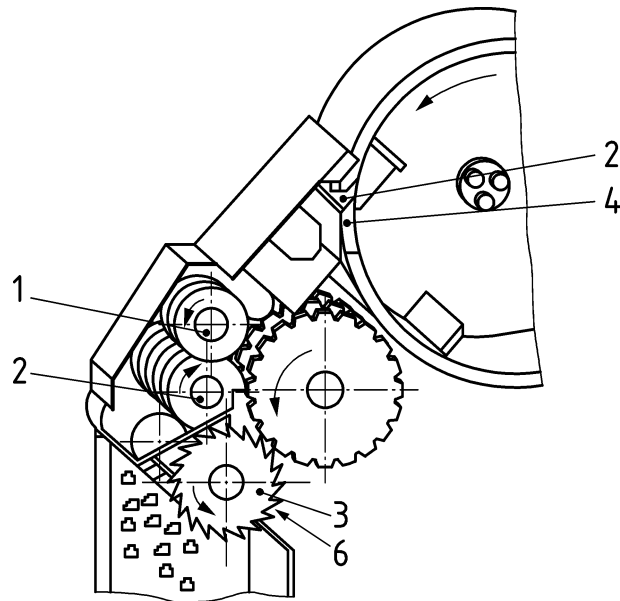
Danger zones on cubes cutting machine with conveying unit and feed conveyor
